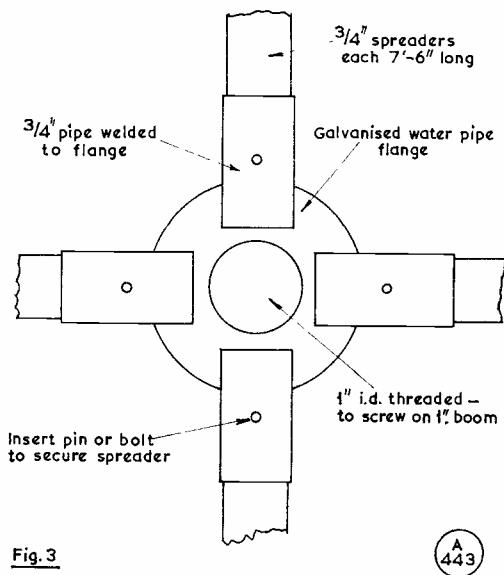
The flange and mounts for the Mini-Quad spreaders. The minimum of metal should be allowed in the field of the assembly.
